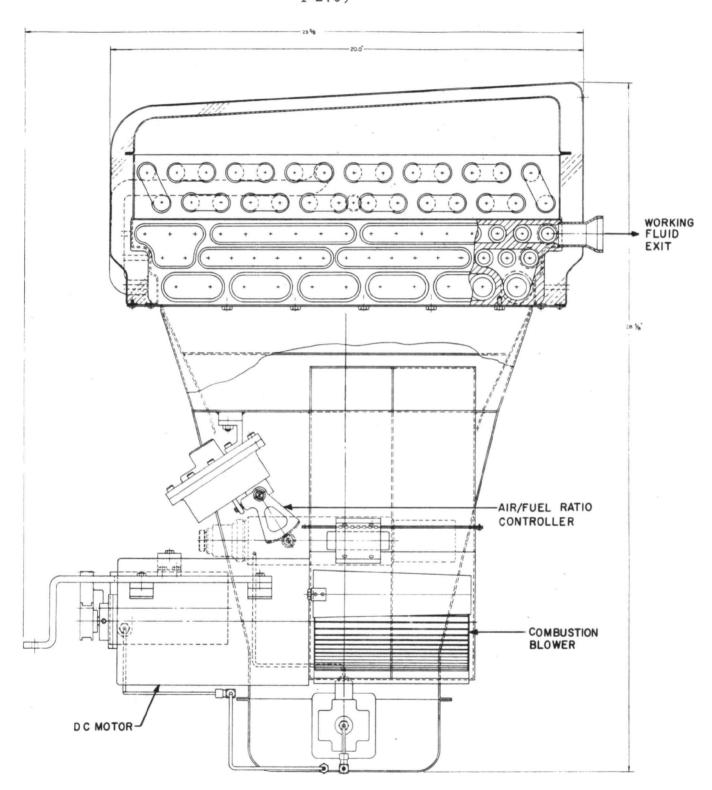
Side View of Combustion System-Boiler Subassembly.
